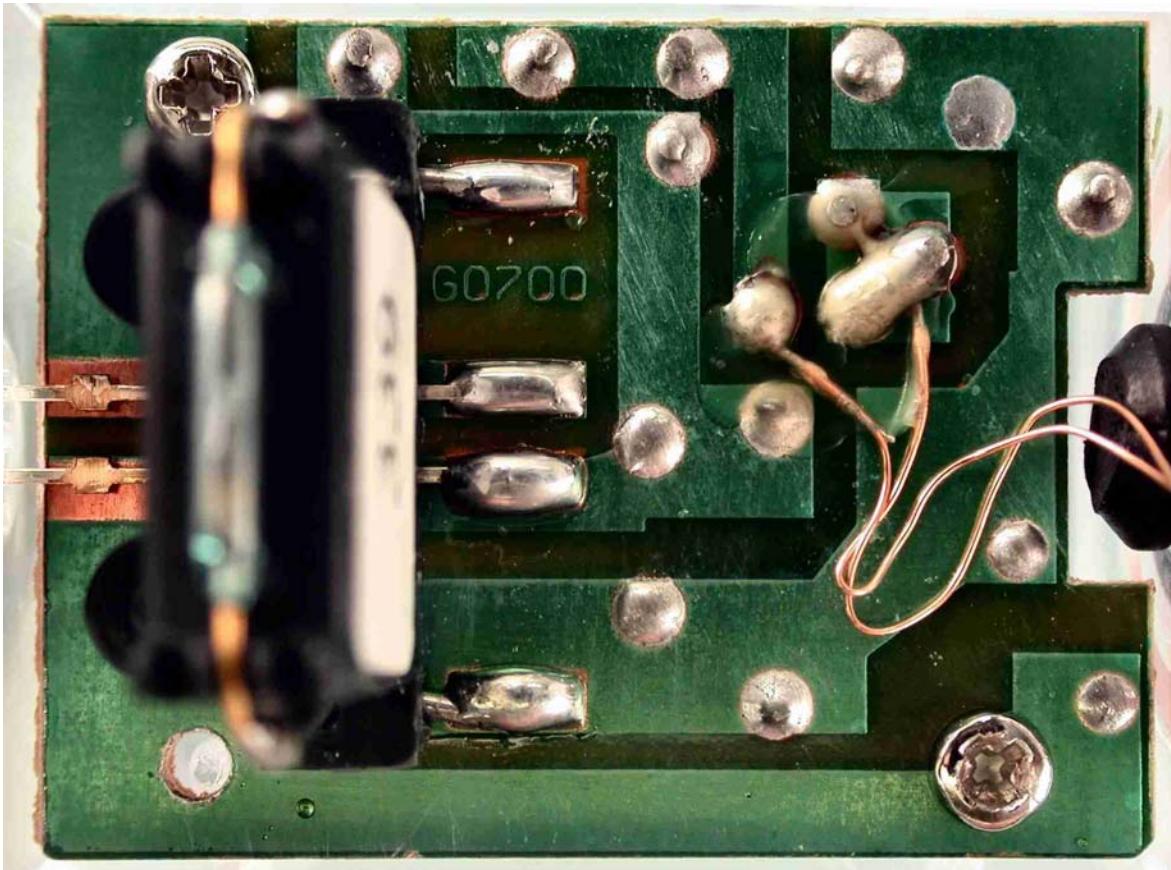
Enlarged view of etch side of the single sided circuit board. Traces are accessible for measurements.
